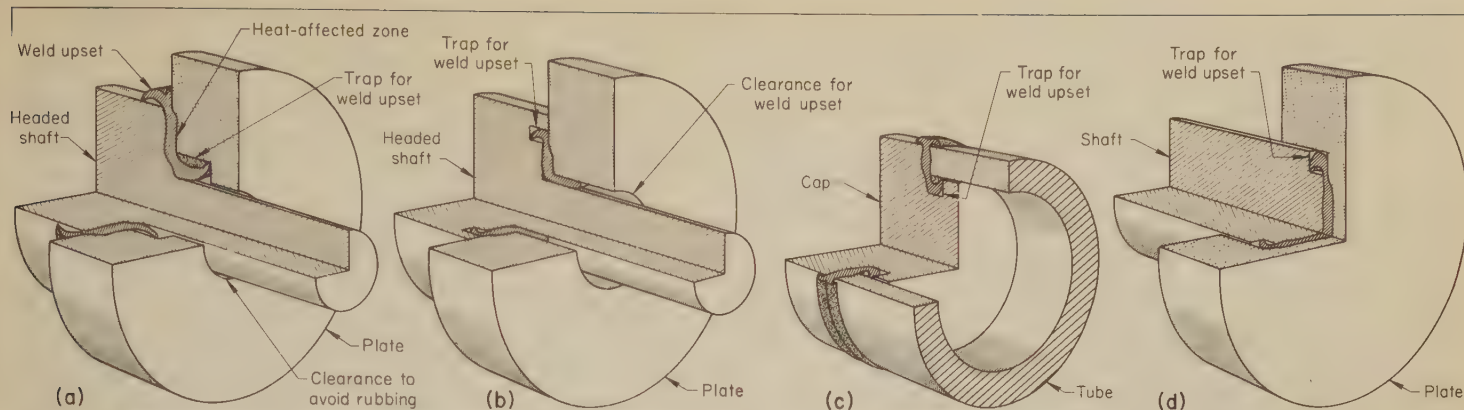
Recesses used as traps for weld upset in friction welded joints. (See discussion in text, under "Design for Flow of Weld Upset".)
